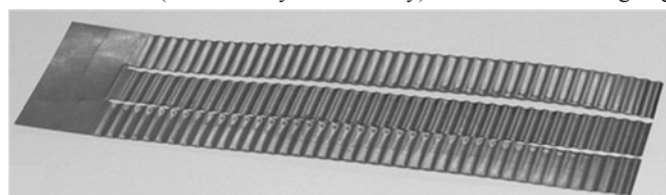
The view of an exemplary foil which was shaped to the foil-air bearings of generation II [2]
